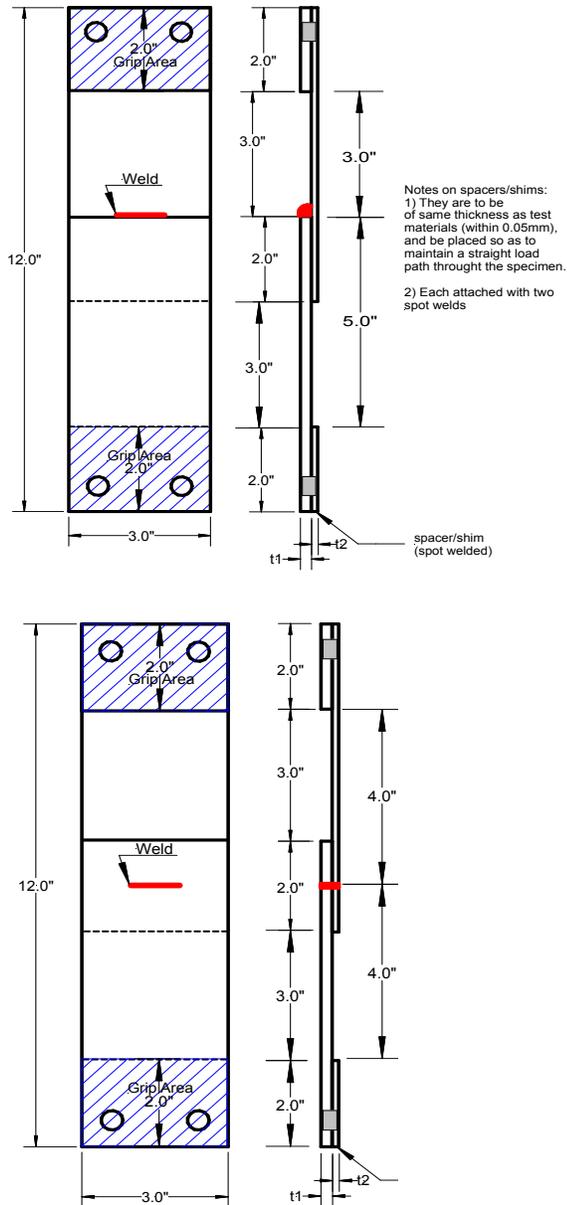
Schematic of specimens for a) GMAW and b) Laser weld fatigue tests. Dimensions in mm.
